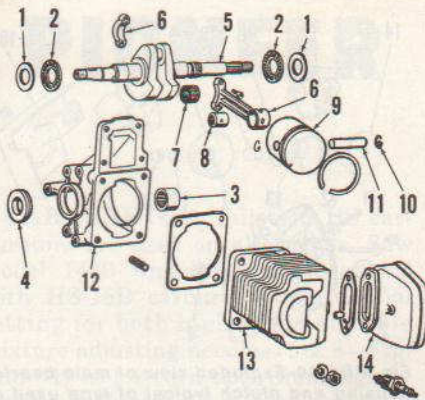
Exploded view of the crankshaft, crankcase and cylinder typical of all models.
